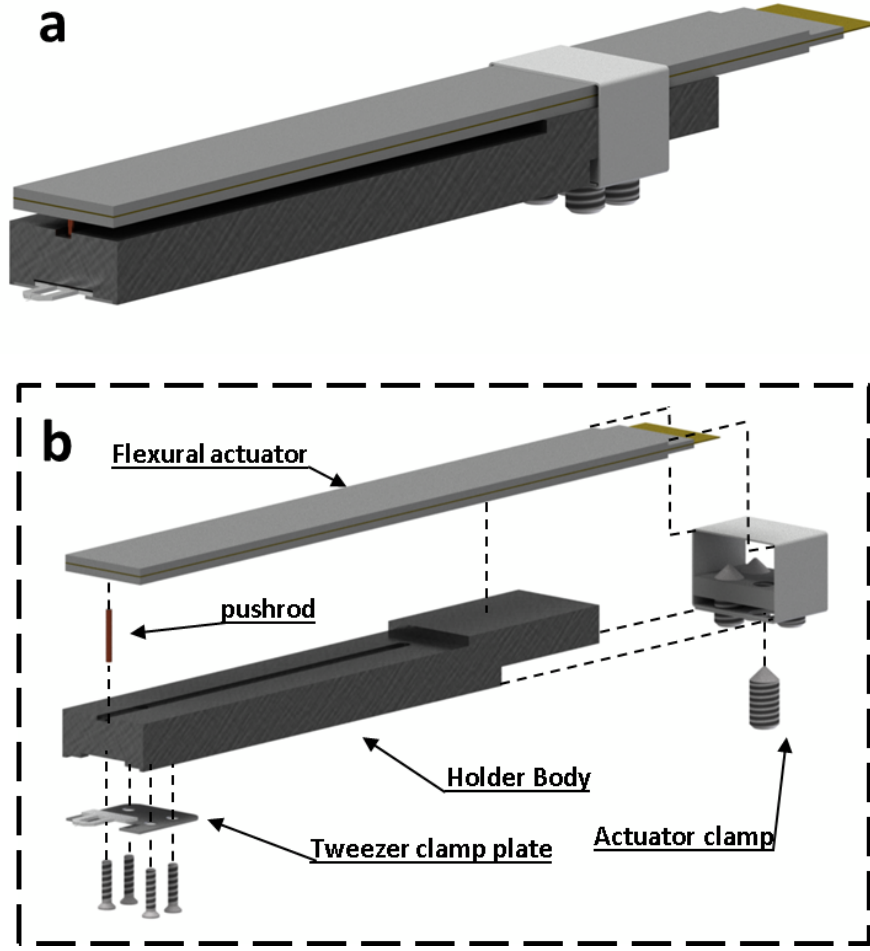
a) assembled tweezer holder and actuator. The design is focused on maintaining a low profile for operation in tight spaces. b) exploded diagram of the tweezer holder assembly. The tweezer clamp plate serves as the side fulcrums for bending the tweezers, while the flexural actuator applies force to the center of the tweezer frame with a pushrod. The actuator is fixed to the holder body with a sheet-metal clamp, which uses set screws to pull downward on the actuator
